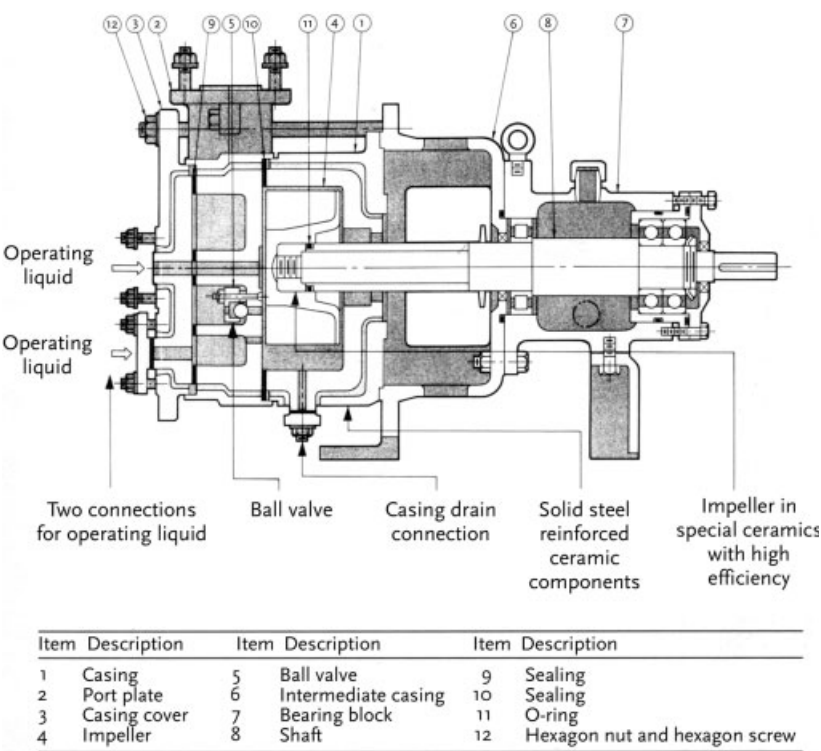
Cross-section of a single-stage ceramic liquid ring vacuum pump with mechanical shaft seal (acc. to NGK)
